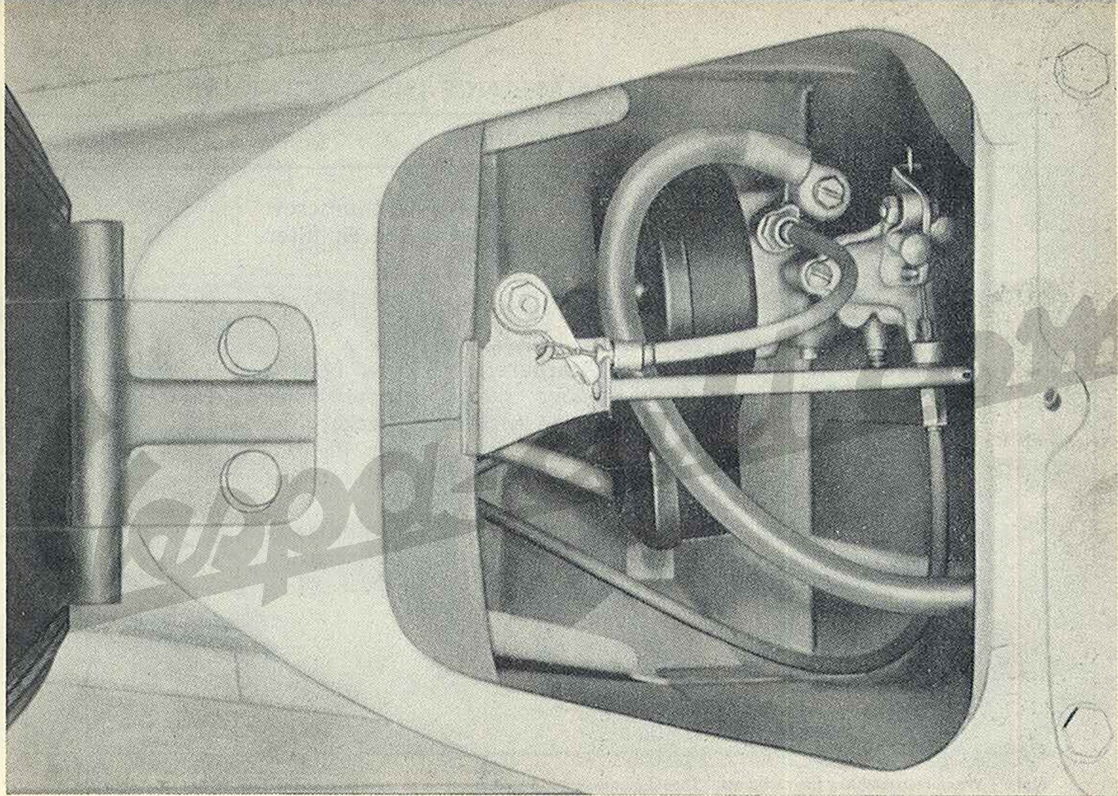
To approach the carburettor and air cleaner assy. (see instructions at page 24).
